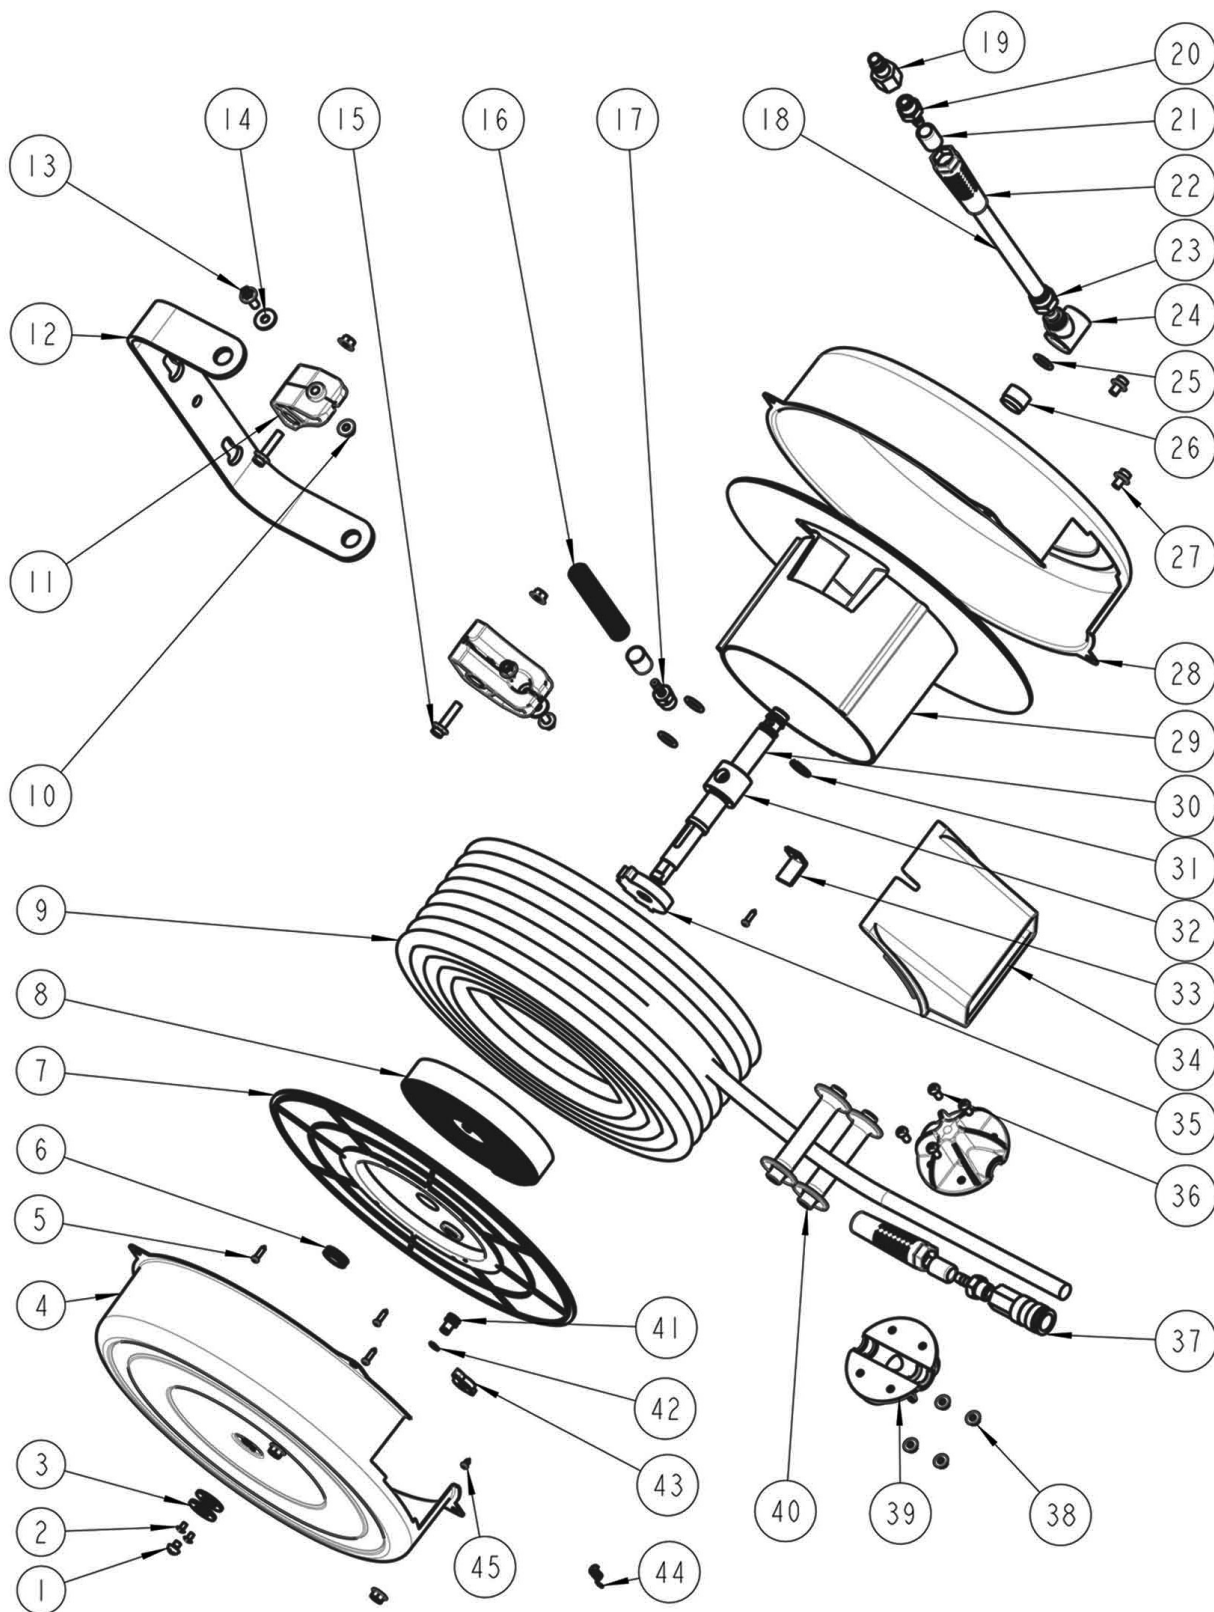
Spare parts drawing SAR 9.5/15 PRO
